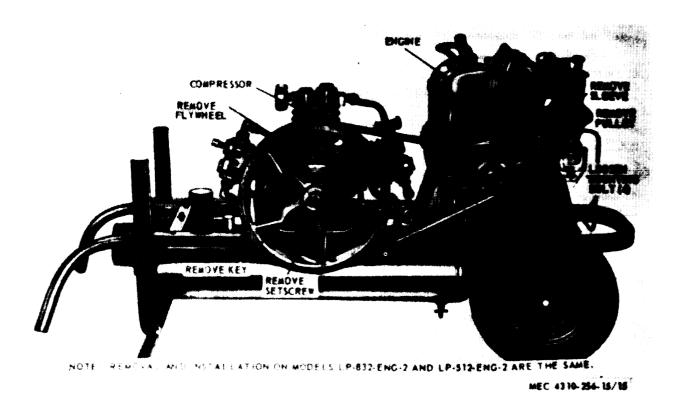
V-belts, crankshaft flywhoel, and drive pulley, removal and installation.
